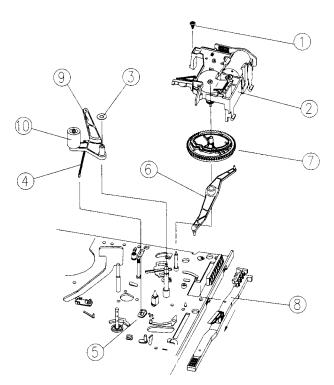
L/C BRKT, PINCH LEVER, CAM GEAR. RELAY LEVER, F/L RACK REMOVAL
